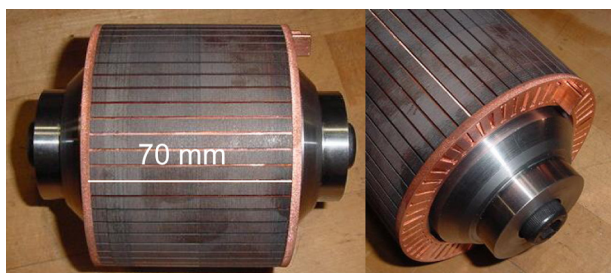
Rotor assembly, lamination stack, spokes, and thin support end rings.
